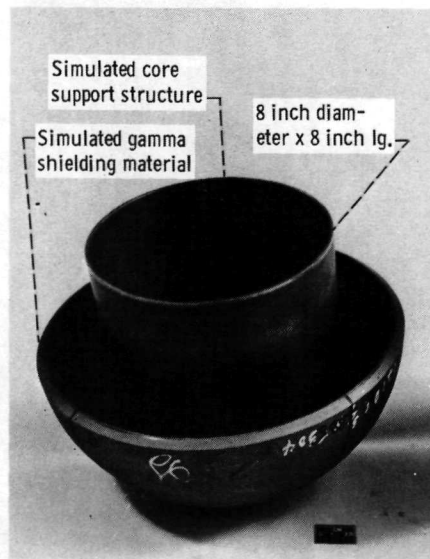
(a). - 8 inch diameter core cylinder welded into 12 inch diameter simulated gamma shielding material.
